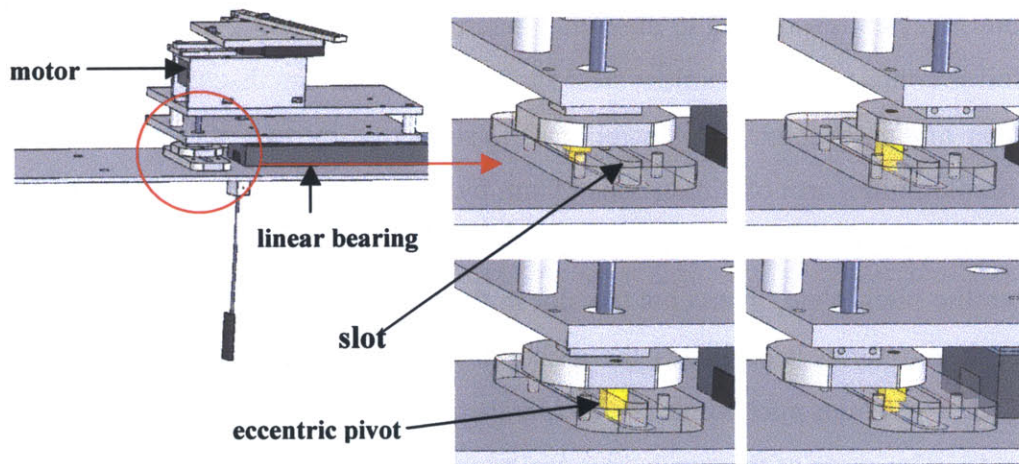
Kinematics of the heave mechanism. The heave mechanism is shown in relation to the rest of the machine on the left hand side. The right hand side shows the mechanism from left to right, top to bottom, at $t=0$, $\pi/2$, π , and $3\pi/2$. As the motor rotates, the eccentric pivot (which is highlighted in yellow) moves back and forth in the slot of the base (which is shown transparent.) This causes the main part of the mechanism, including the motor, to move back and forth atop the linear bearing.
